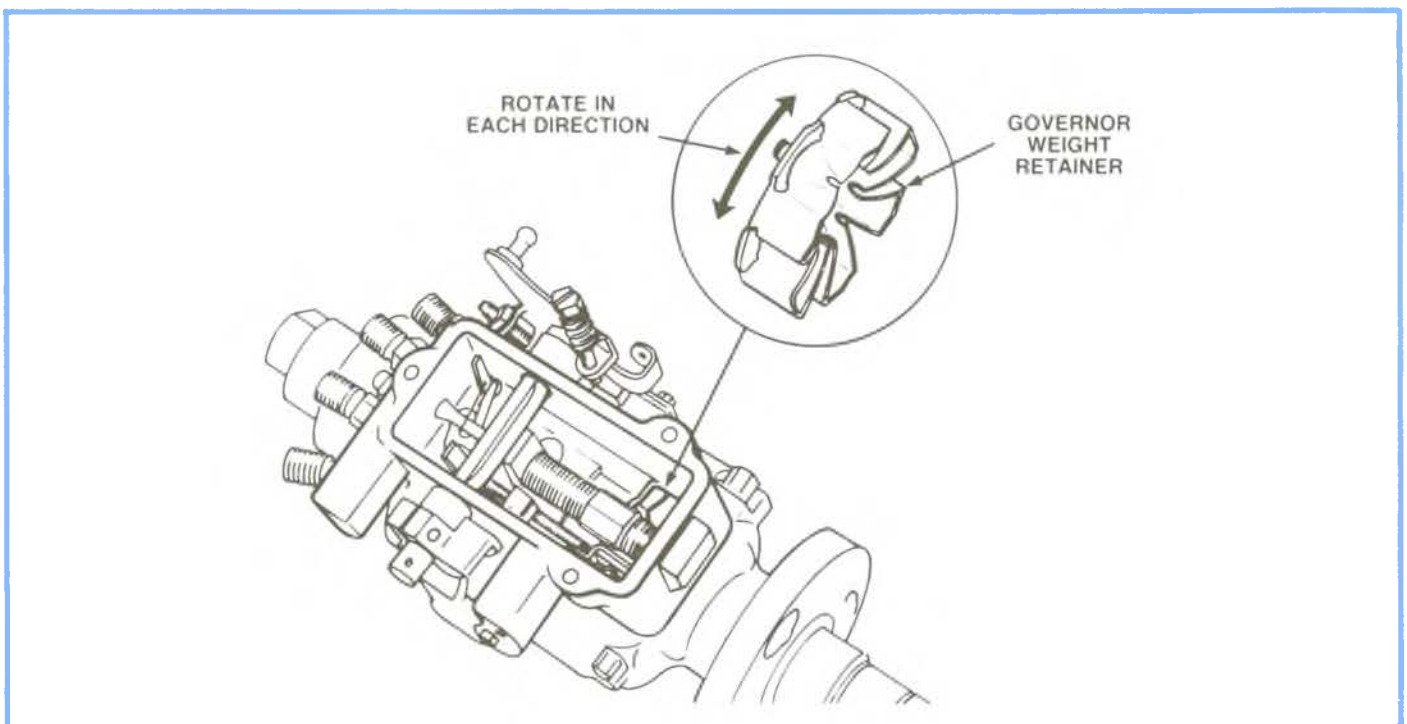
, Failed Governor Weight Retainer Ring Checking Procedure.
